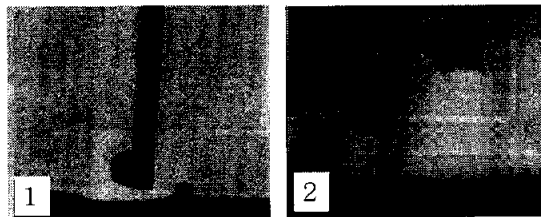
Repelled transfer mode at CO₂ welding
